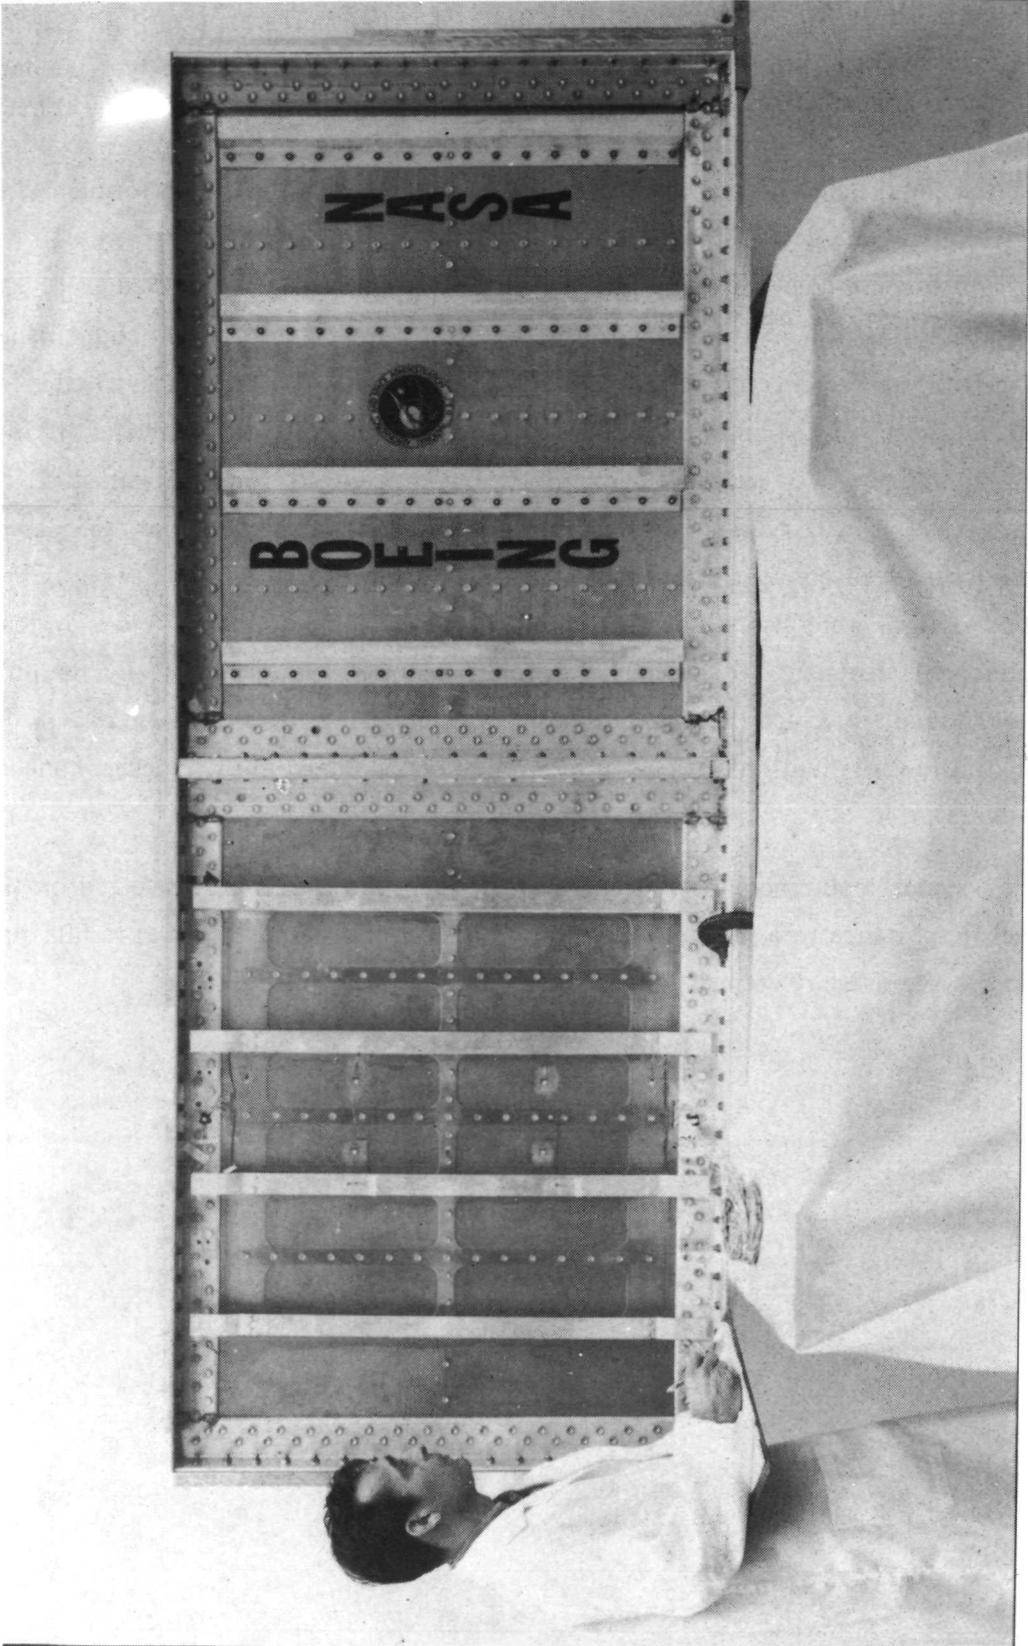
THIRD SHEAR WEB COMPONENT TEST ASSEMBLY
